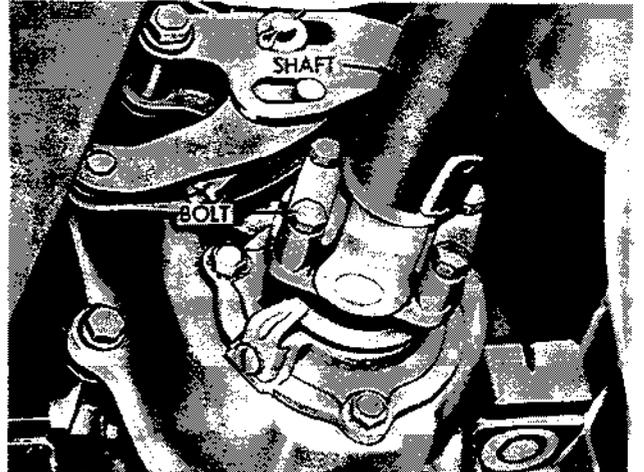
Remove universal joints bolts from transmission end of propeller shaft.
